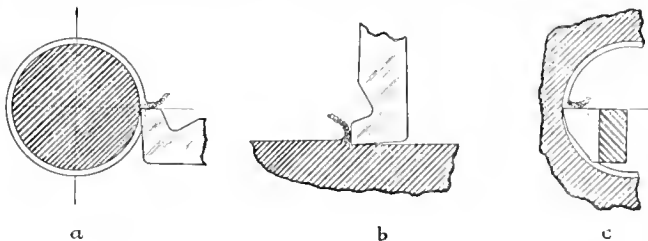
IMPROPER FORMS OF LATHE, PLANNER AND BORING TOOLS
